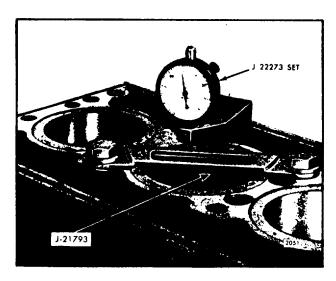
Checking Distance of Liner Flange Below Top Face of Block
